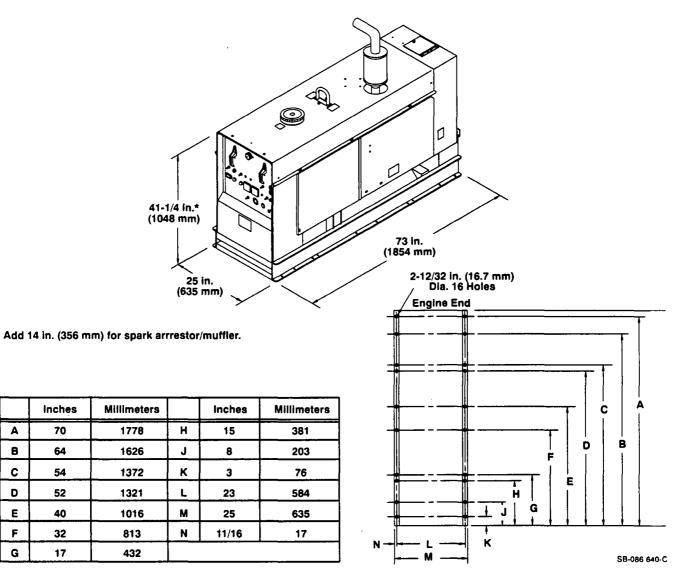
Overall Dimensions And Base Mounting Hole Locations
